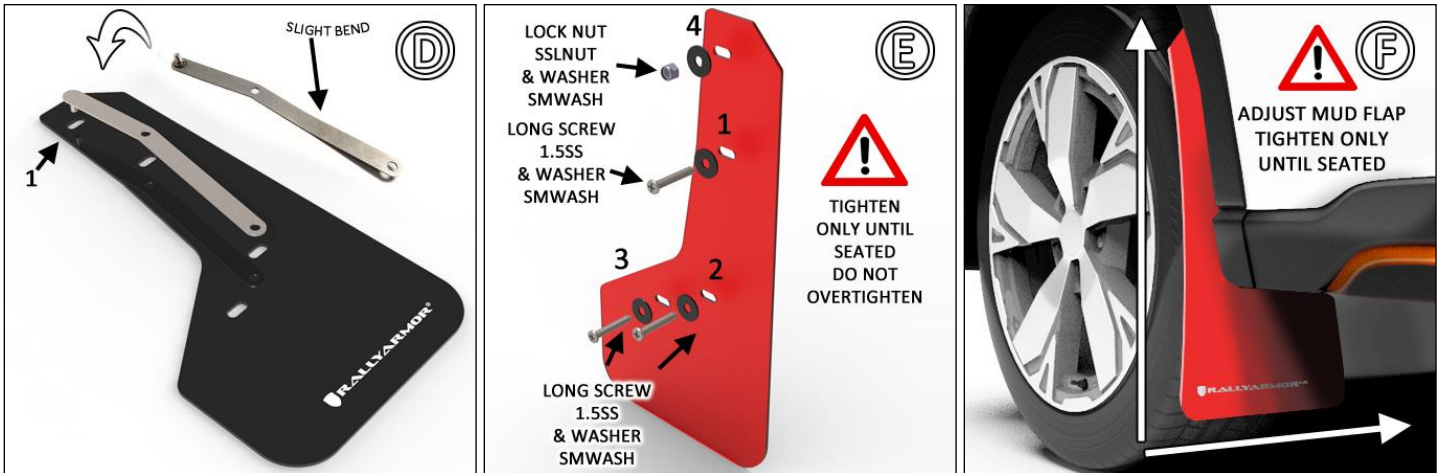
FIGURE D Gently bend bottom of BMF52-LF/RF to conform to wheel well. Place bolt-end of bracket over logo-side of flap through mount 1.
